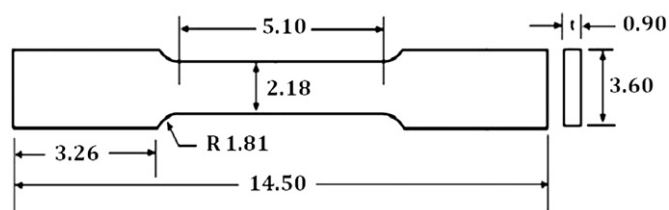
A schematic of the tensile specimens (two dimensional) with dimensions. All dimensions are in mm.
